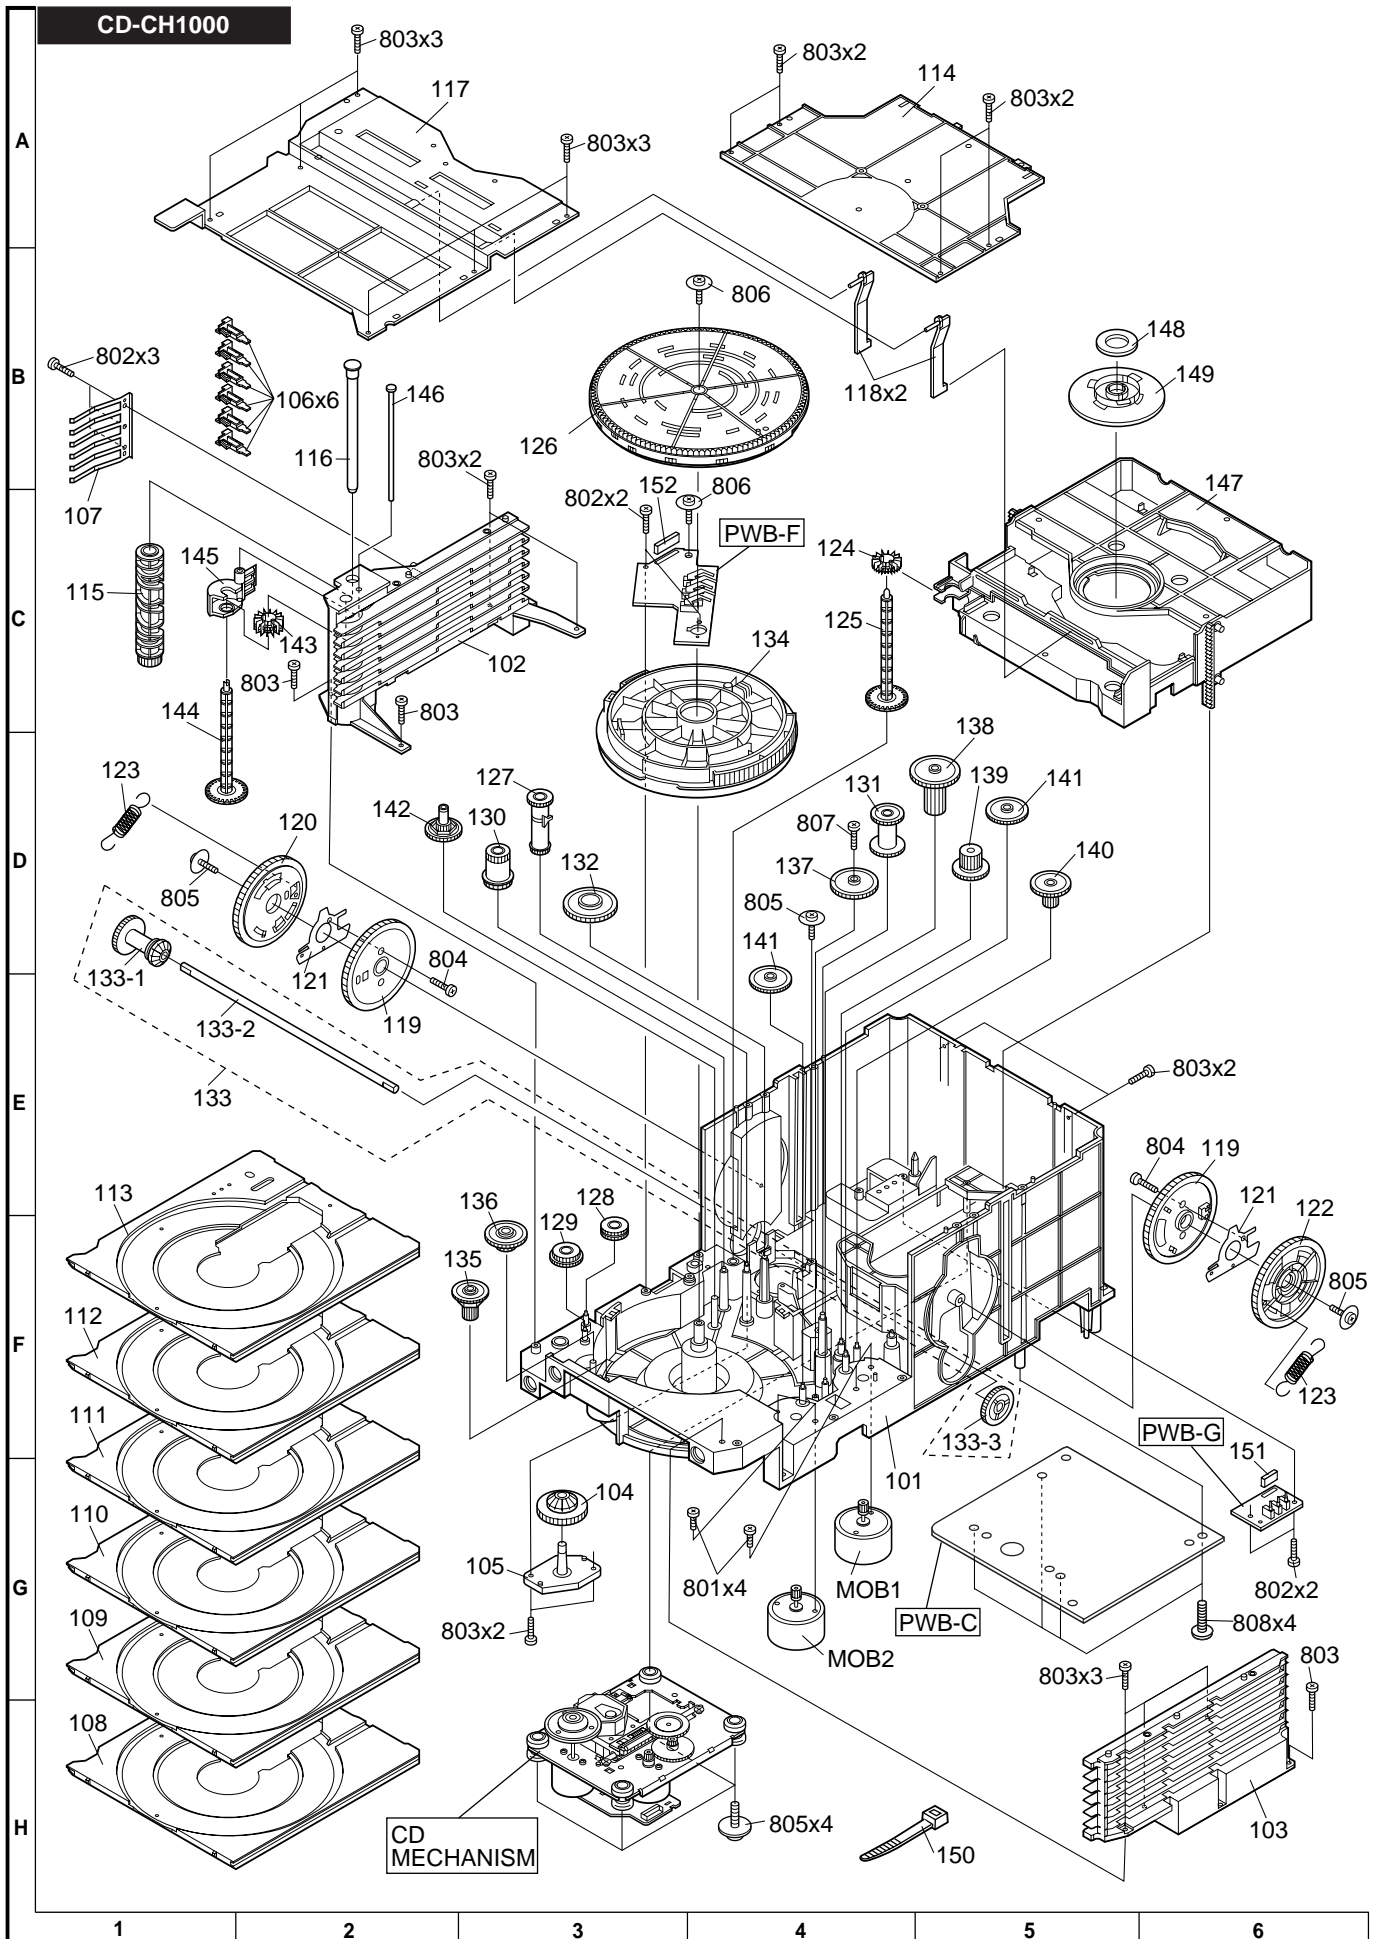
CD CHANGER MECHANISM EXPLODED VIEW
